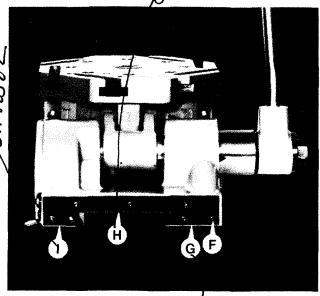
Dovetail Wipers for Cross Slide CH8050 R
